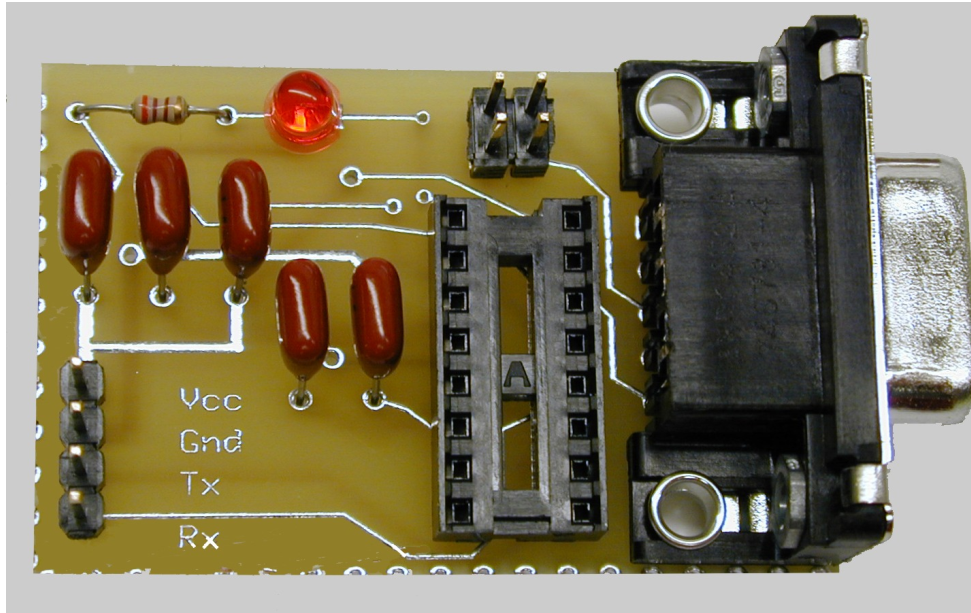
Assembled circuit board before U1 (MAX232) is inserted
